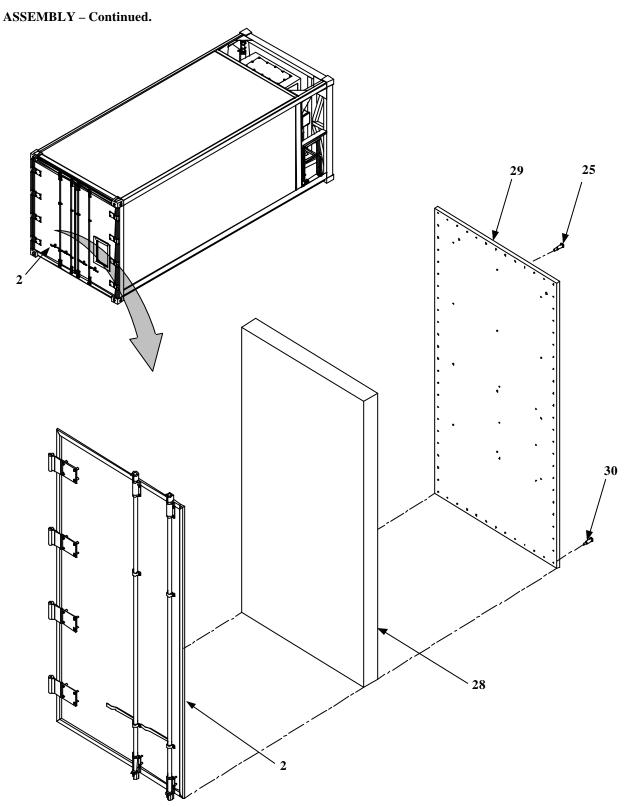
Rear Door, Left – Assembly (Sheet 3 of 3)
